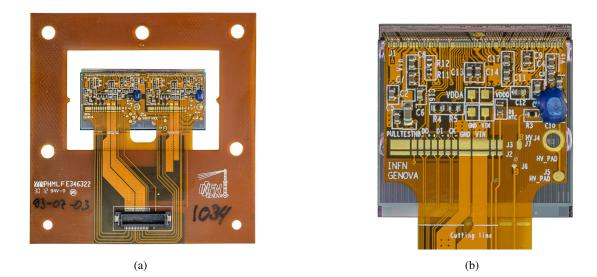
Modules of the IBL. (a): double chip module with handling frame and module connector, (b) magnification of a single chip module with FBK 3D-sensor. VDDA/VDDD pads are used to sense the regulator output voltage.
